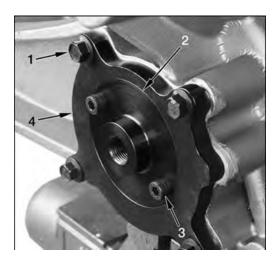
HP Fuel Pump Removal Tool on Drive Housing
